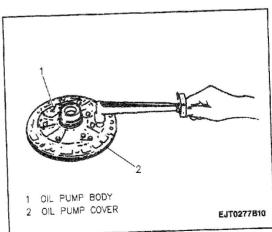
Oil Pump Body to Oil Pump Cover Bolts
